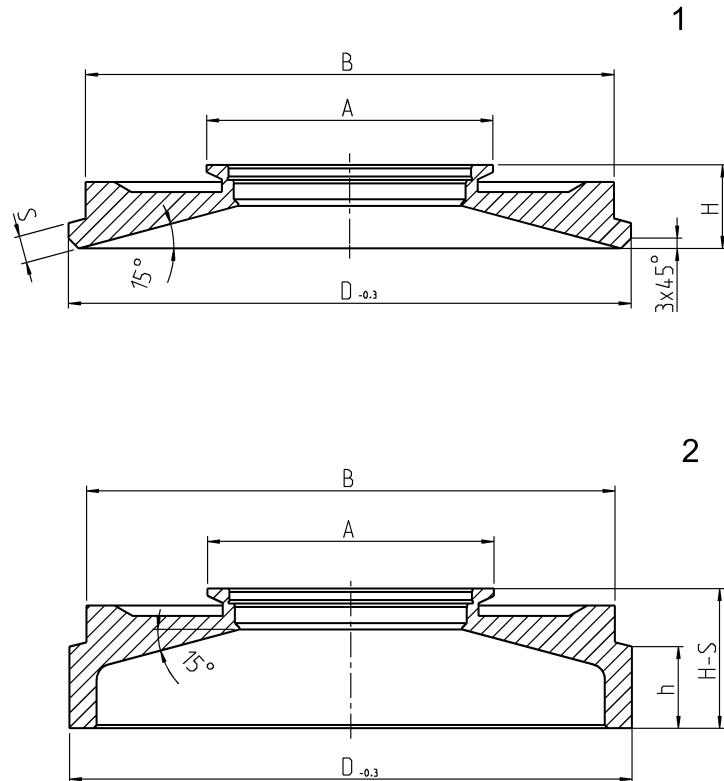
1= housing connection flange T / 2= housing connection flange T-S
